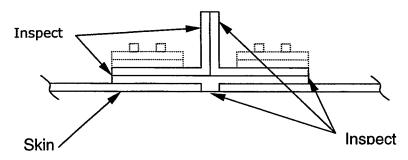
INSPECTION LOCATIONS FOR MAIN SPAR LOWER CAP
